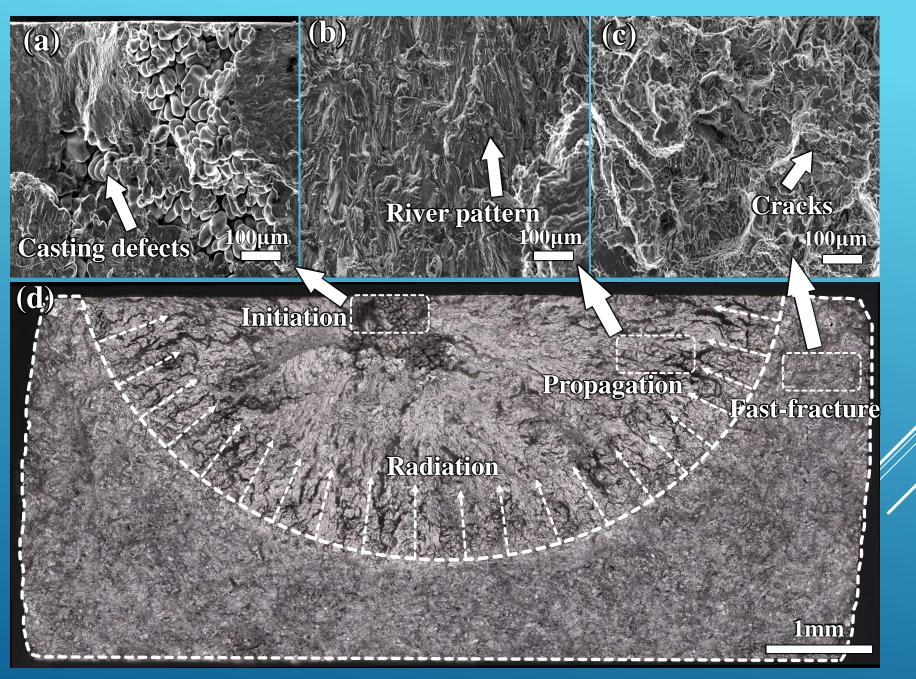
Fatigue test fractography of T6-treated A356-1Ce sample at 90 MPa
